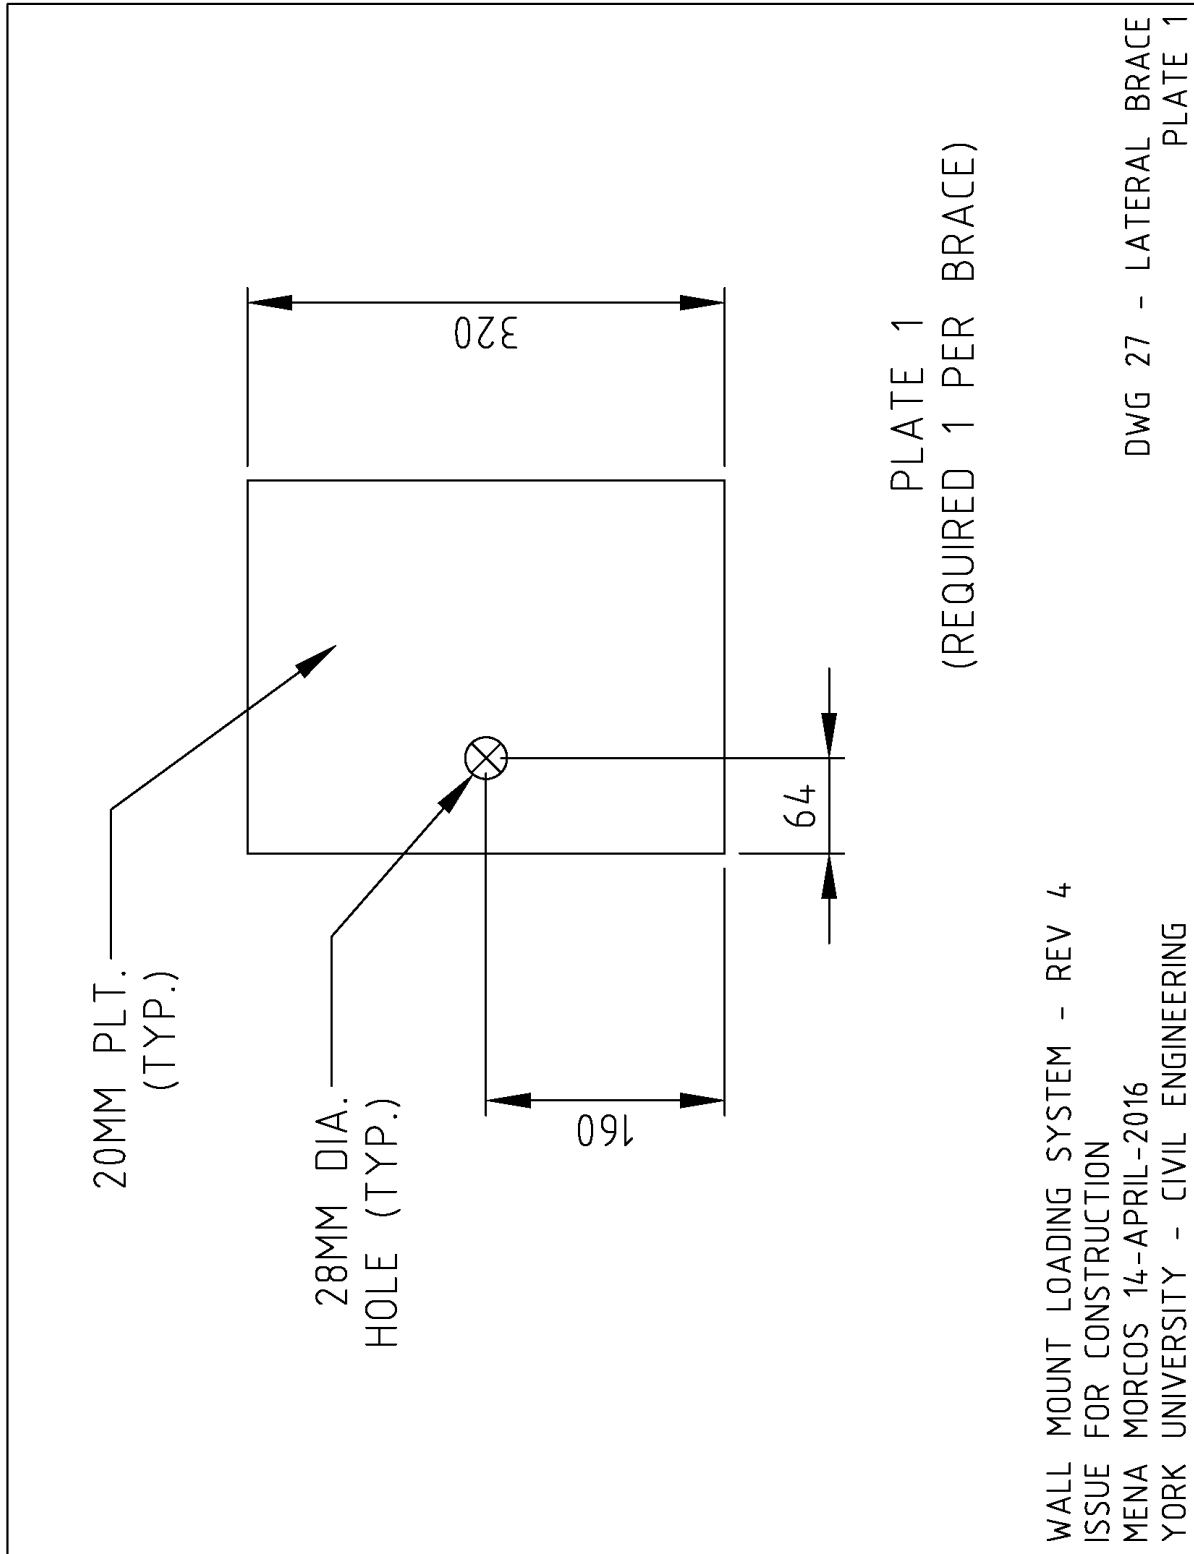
Wall mount loading system design and fabrication drawing – Drawing 27.
